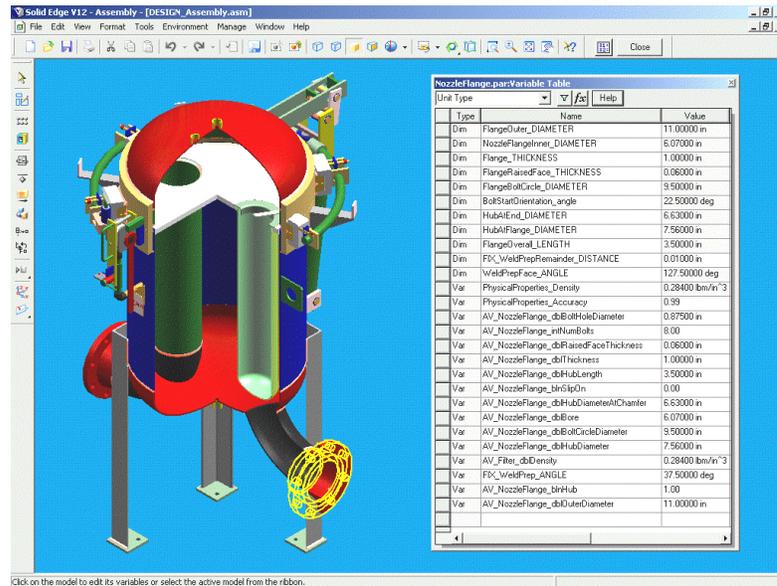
Sectioned 3D CAD Assembly with 1,000s of Design Variables
